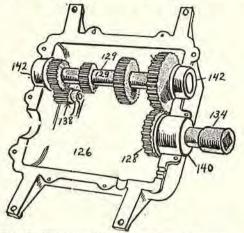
The k wer half of transmission with countershaft (129) and its gears which are permanently attached thereto. Idler gear (138), clutch or main drive gear (128), and clutch shaft (134) are also illustrated.
